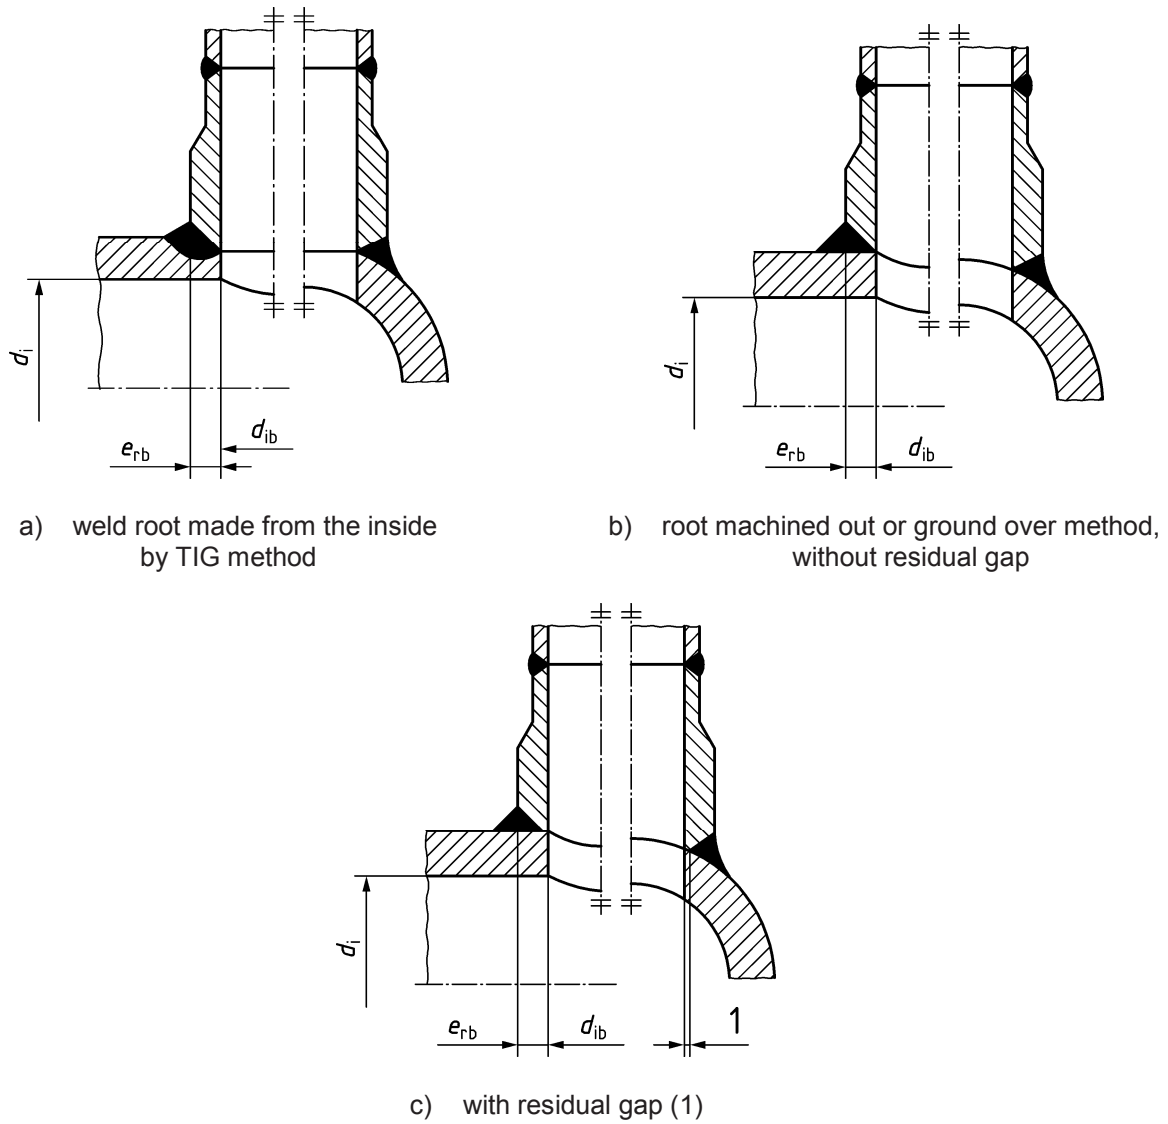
Reinforcement by means of welded-on branch
